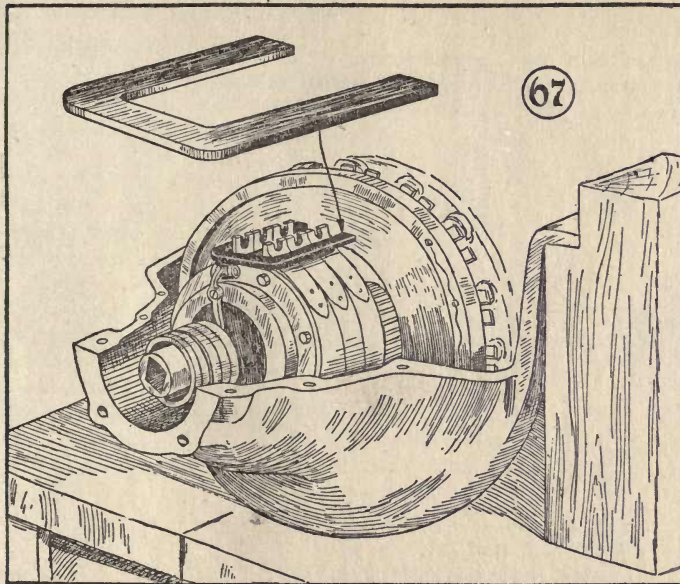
The lugs of the bands are held together with a U-shaped rod so that the pedal shafts will rest in the notches
